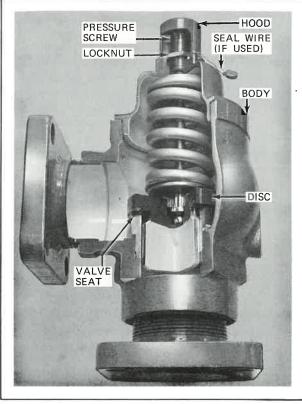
LUBE-OIL RELIEF VALVE, CUTAWAY VIEW.
